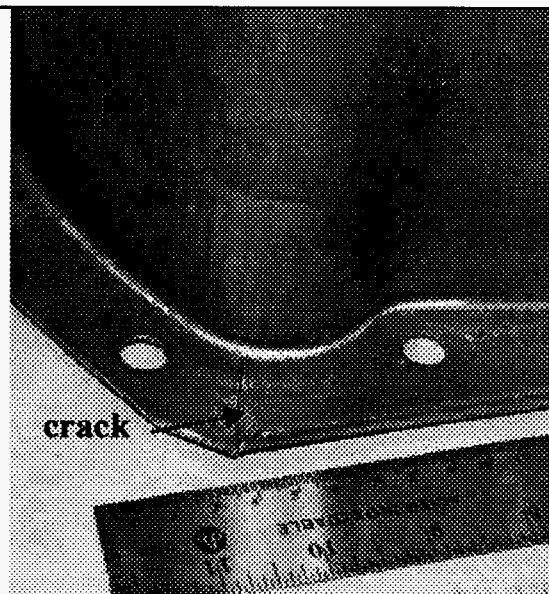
(d). Crack in a corner of a large diesel engine oil pan shown in Fig. 39(c).
